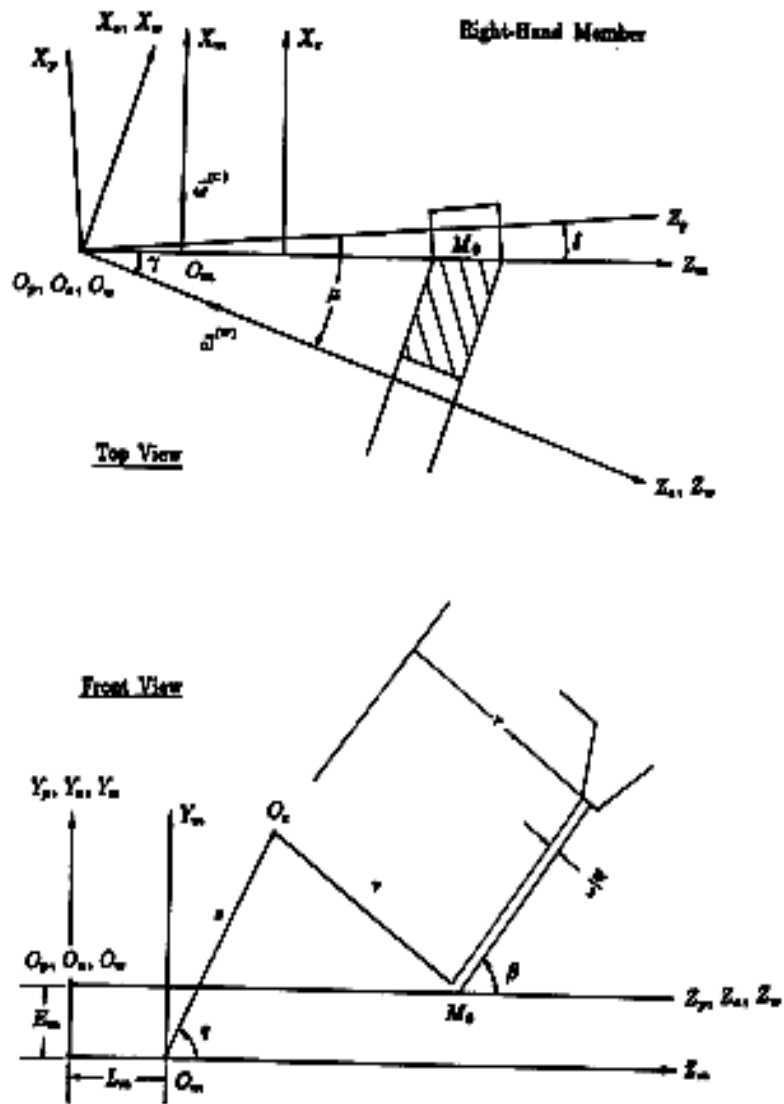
Top And Front Views Of Right-Hand Gear Generator.
